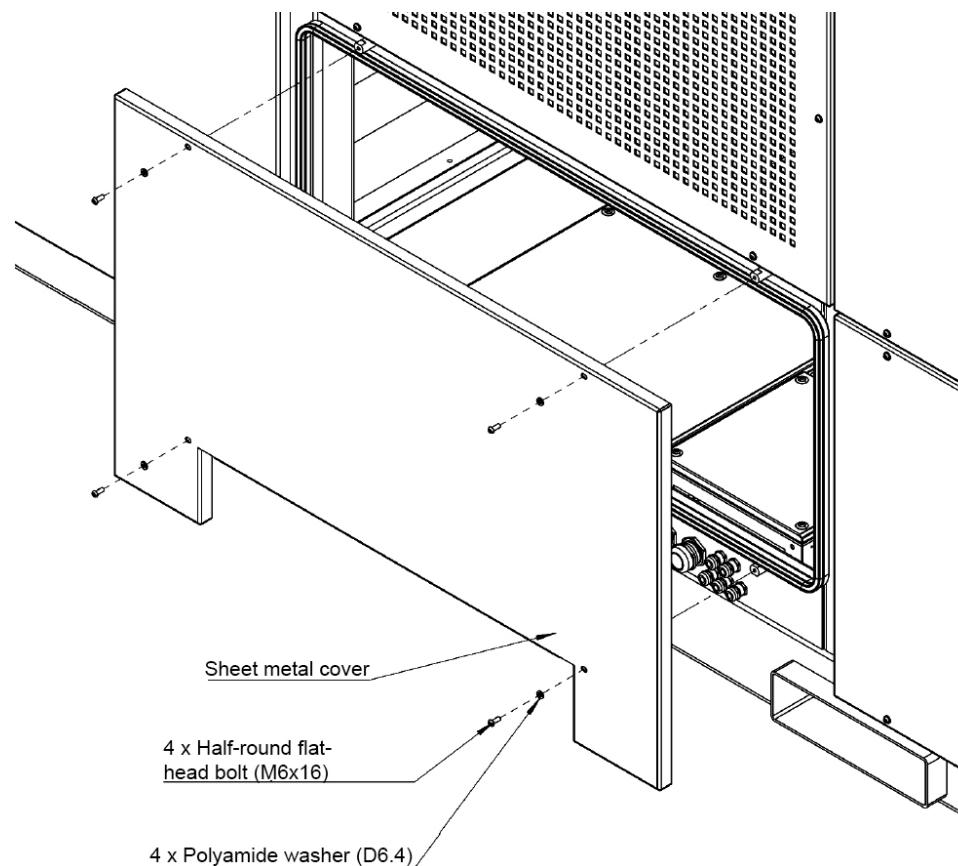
Disassembly — Sheet metal cover with notch for cable connections
